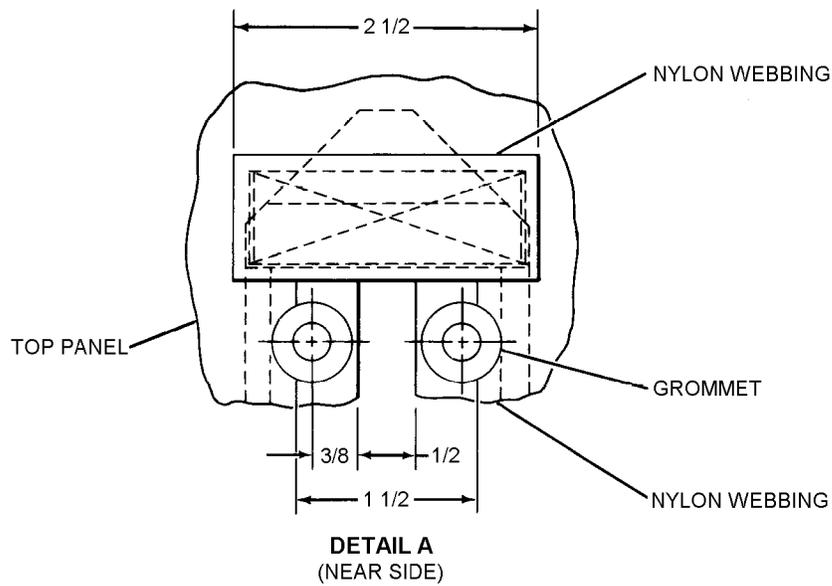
Top Panel Details and Handle Assembly, Survival Equipment Container Assembly
